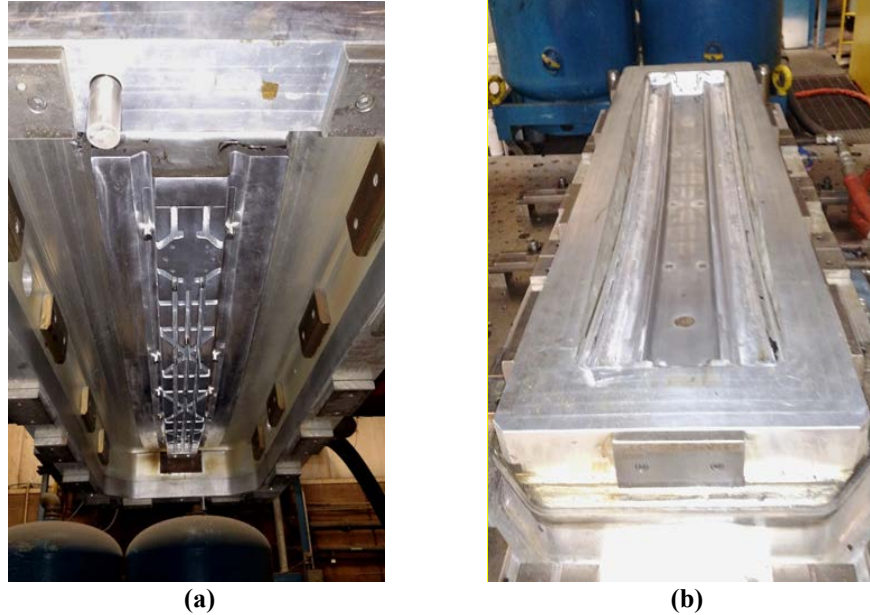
Images of the bumper beam mold showing (a) the upper half and (b) the lower half of the mold.
